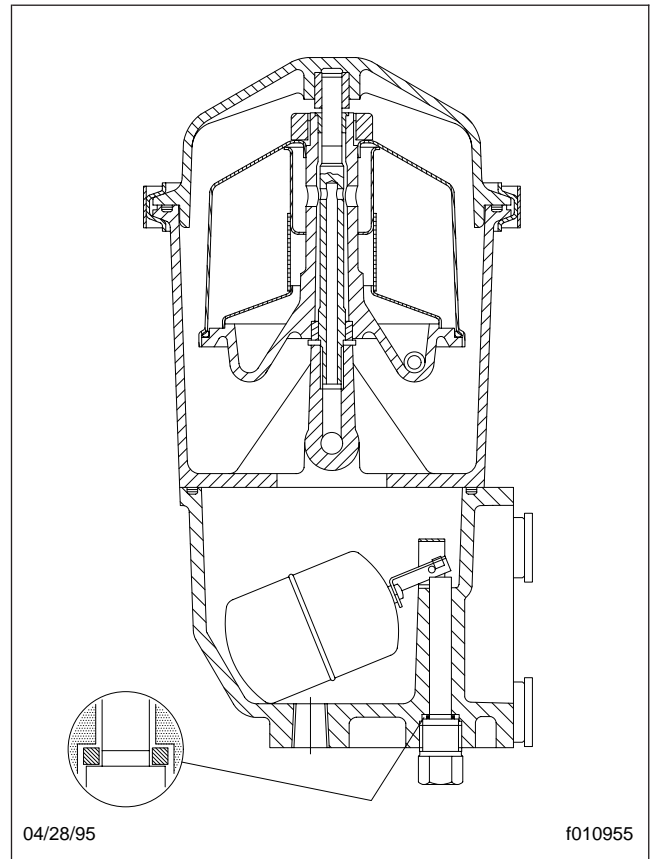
, Spinner II Bypass Oil Filter (sectional view)
